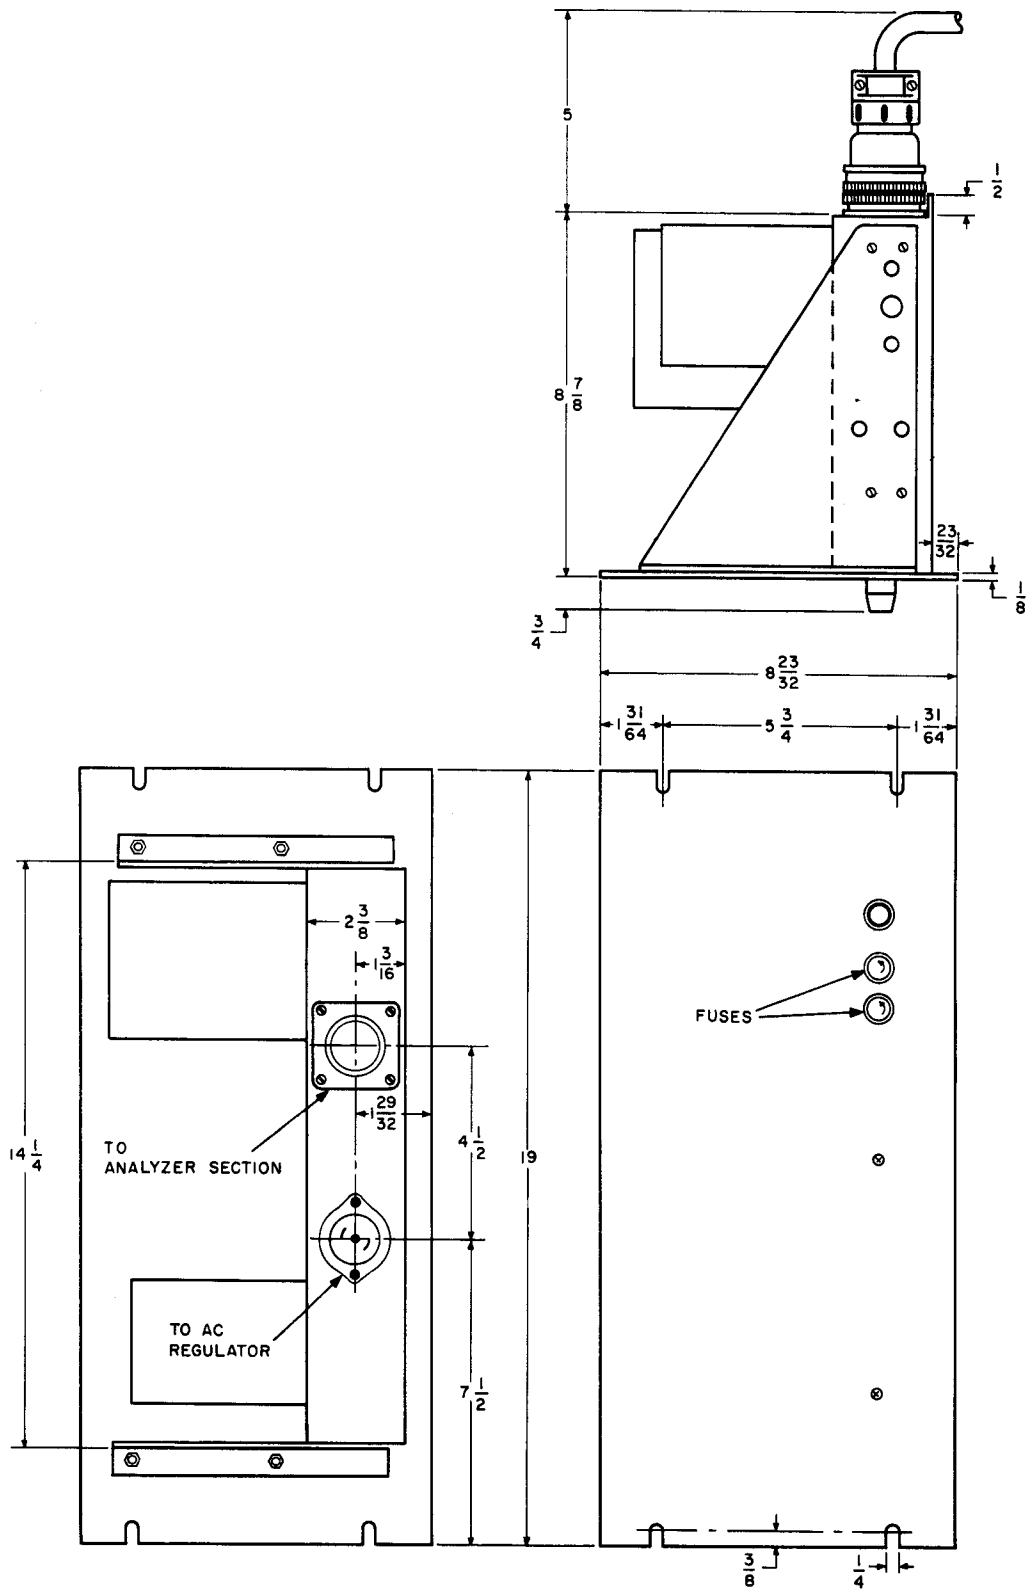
Outline Dimensional Drawing, PS-12, Rack Mount Style
